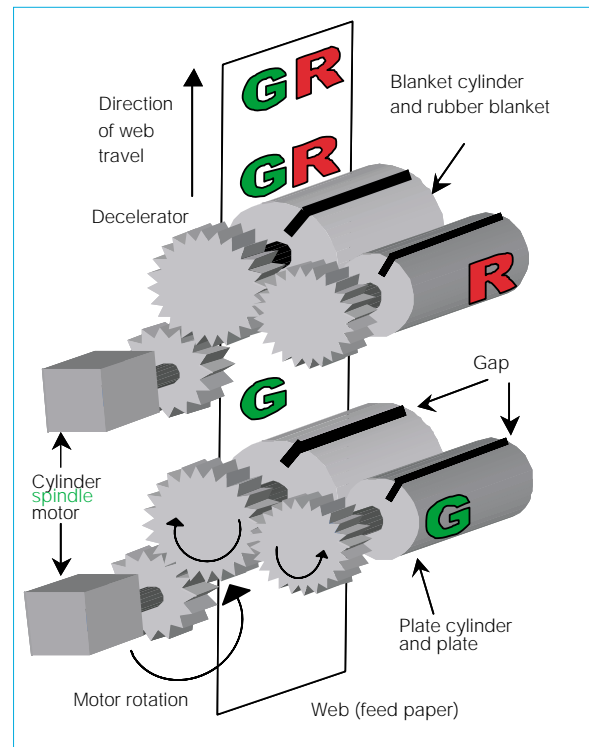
Cylinder spindle servo mechanism (surface printer section only)
